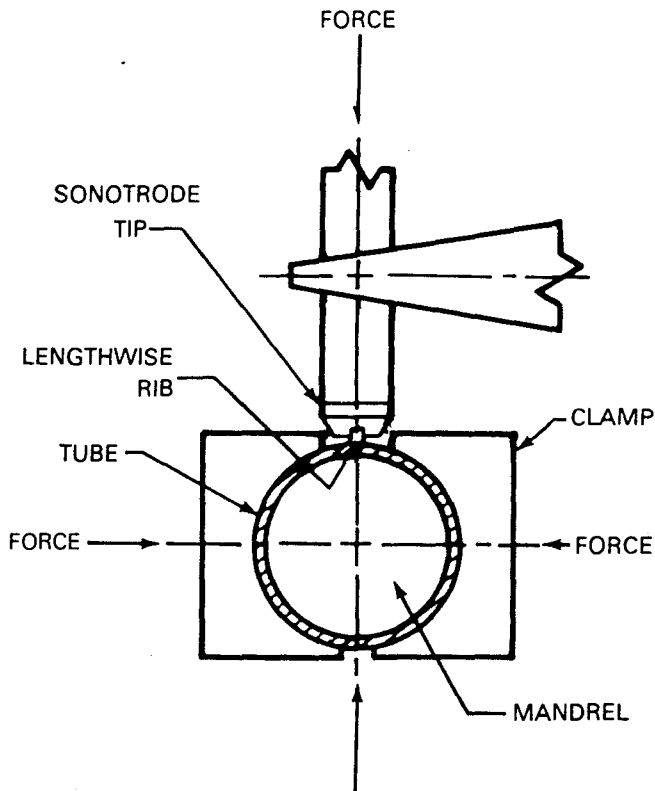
Welding Array for Joining Small Longitudinal Ribs to Cylinders
